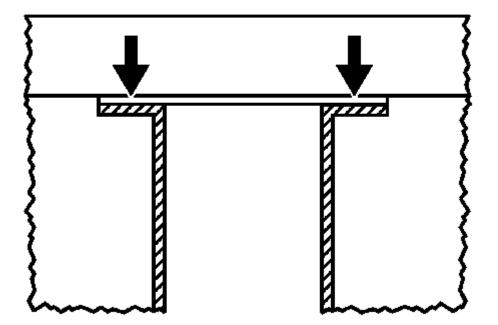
Checking Cylinder Block Deck Surface With Straight Edge Courtesy of GENERAL MOTORS CORP.
